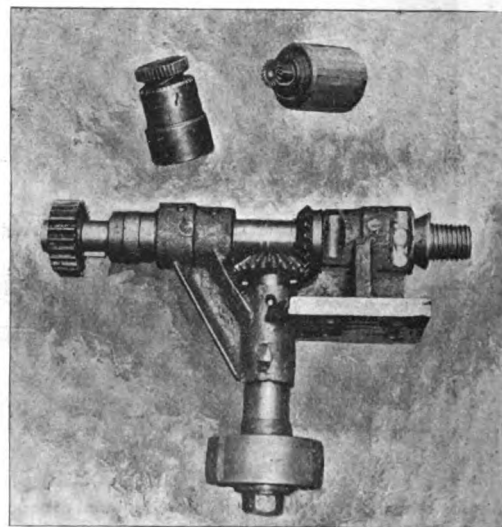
FOR CUTTING KEYWAYS, ETC.
